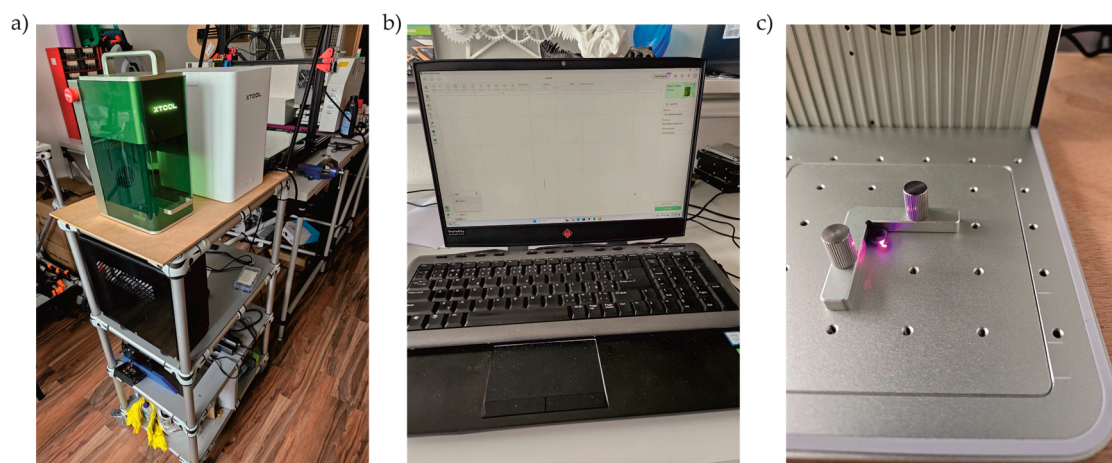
Laser engraving workstation: (a) xTool F1 machine; (b) PC workstation with xTool Creative Space software (v2.2.23); (c) working space with fixed round cutting insert visible laser dot.
